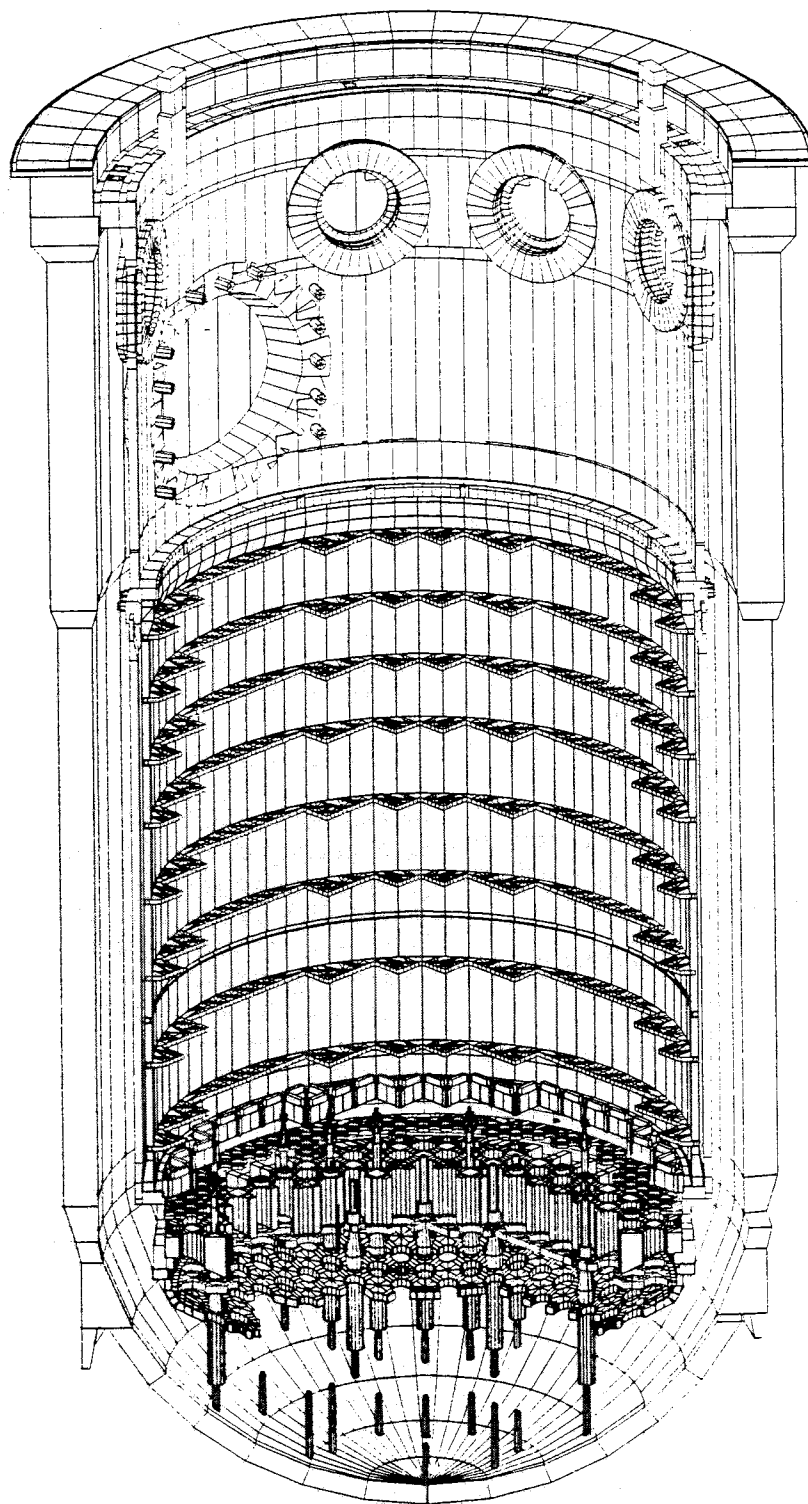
Reactor Vessel with Baffle Plates Removed and LCSA Cut Out
